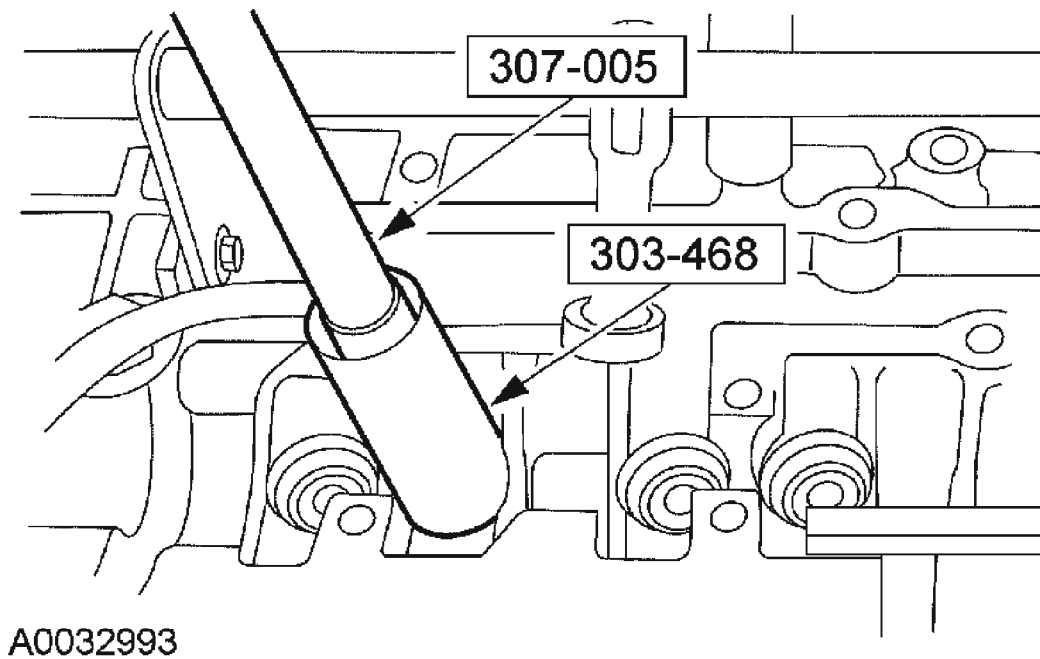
Using Special Tools To Remove Valve Stem Seals
